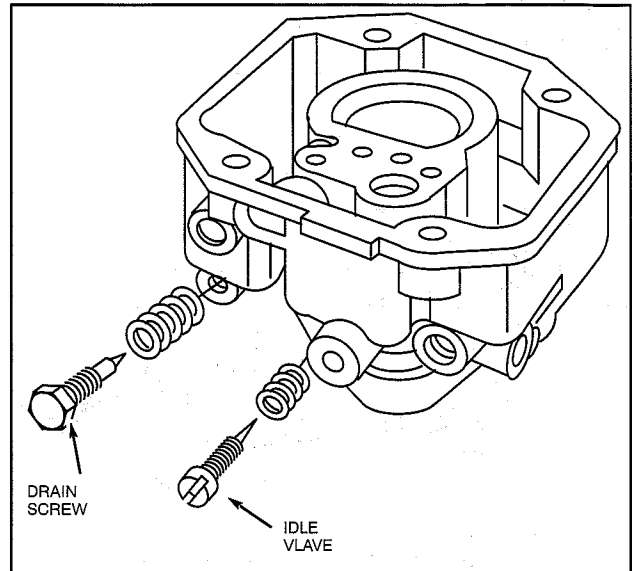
Removing Idle Mixture Valve And Drain Screw
